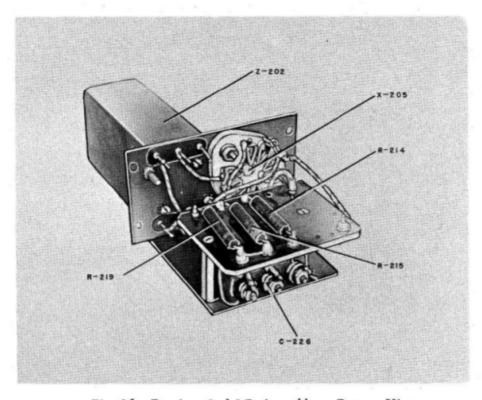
Receiver 2nd I-F Assembly - Bottom View
